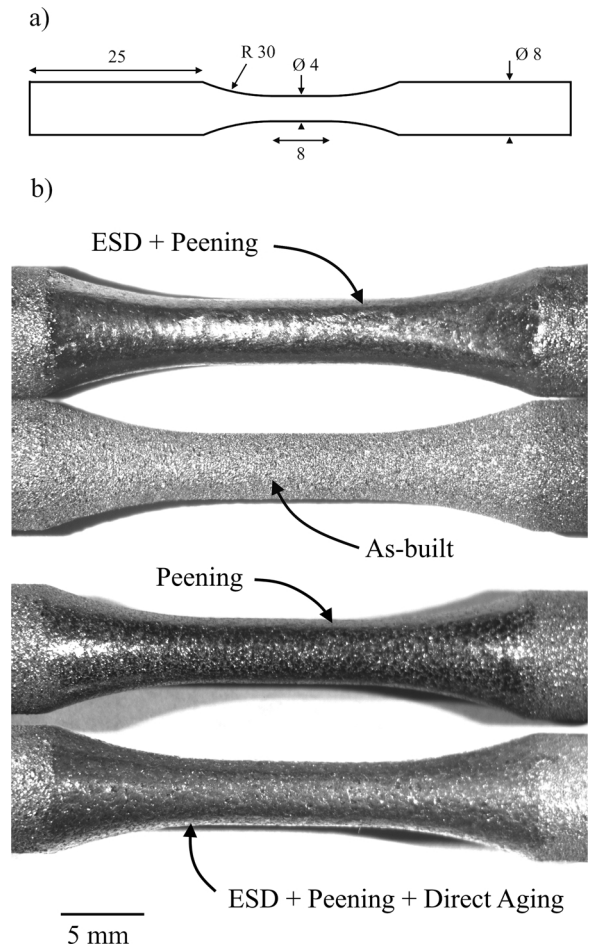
a) Fatigue testing specimen dimensions in mm and b) samples in the as-built and post-processed conditions.
